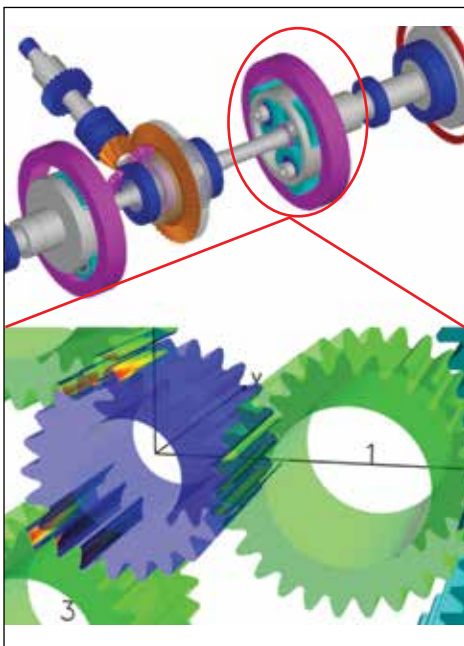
Display of gear units with KISSsys and automatic linkage of the shafts with the KISSsoft contact analysis module.
